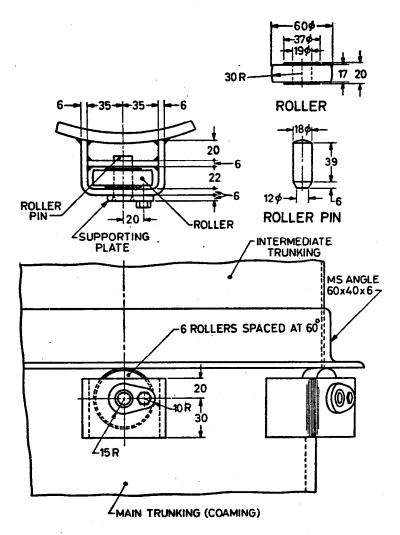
Assembly and Details of Type A Mechanical Turning Arrangement for Steel Cowl Ventilators
